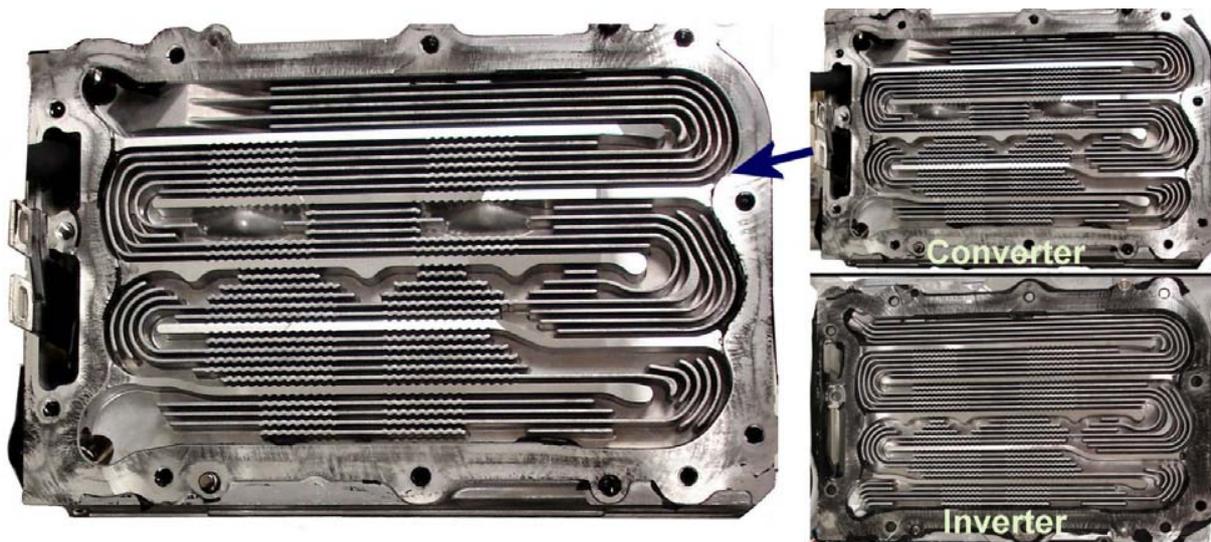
General assembly and packaging of the Camry inverter and converter.
